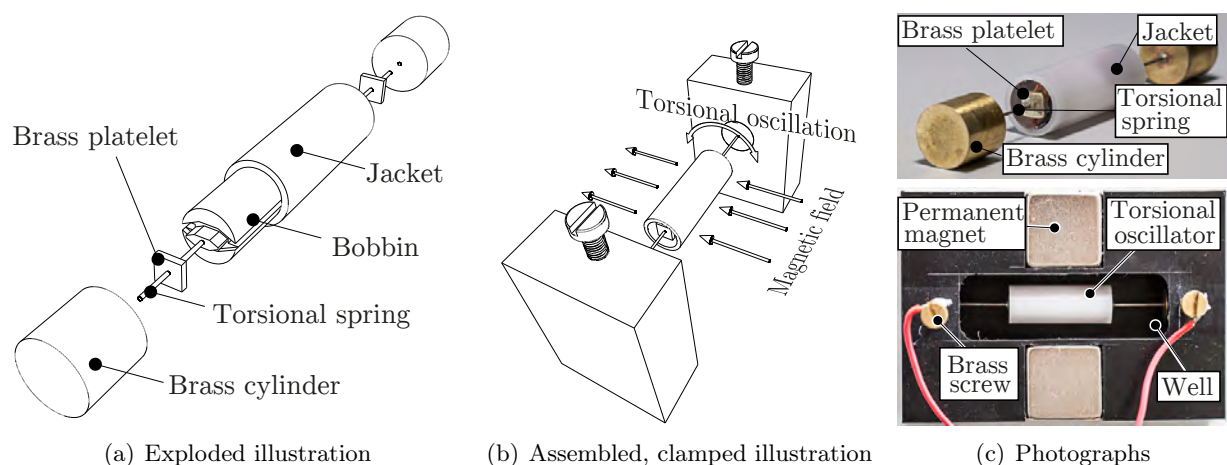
(a) Exploded view of the torsional resonator. (b) Illustration of the assembled, clamped setup. (c) The upper photograph shows the manufactured torsional oscillator. The lower photograph shows the complete setup including both permanent magnets and the torsional oscillator placed in the experimental well which was filled with the sample liquids.
